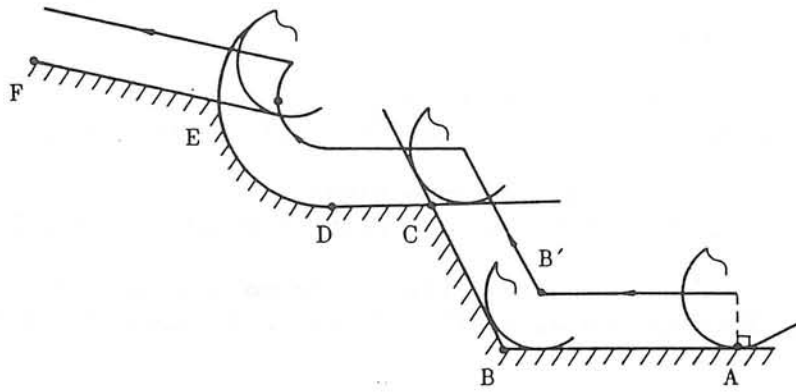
Ø-4 Tool Path with Tool Nose Radius Compensation
